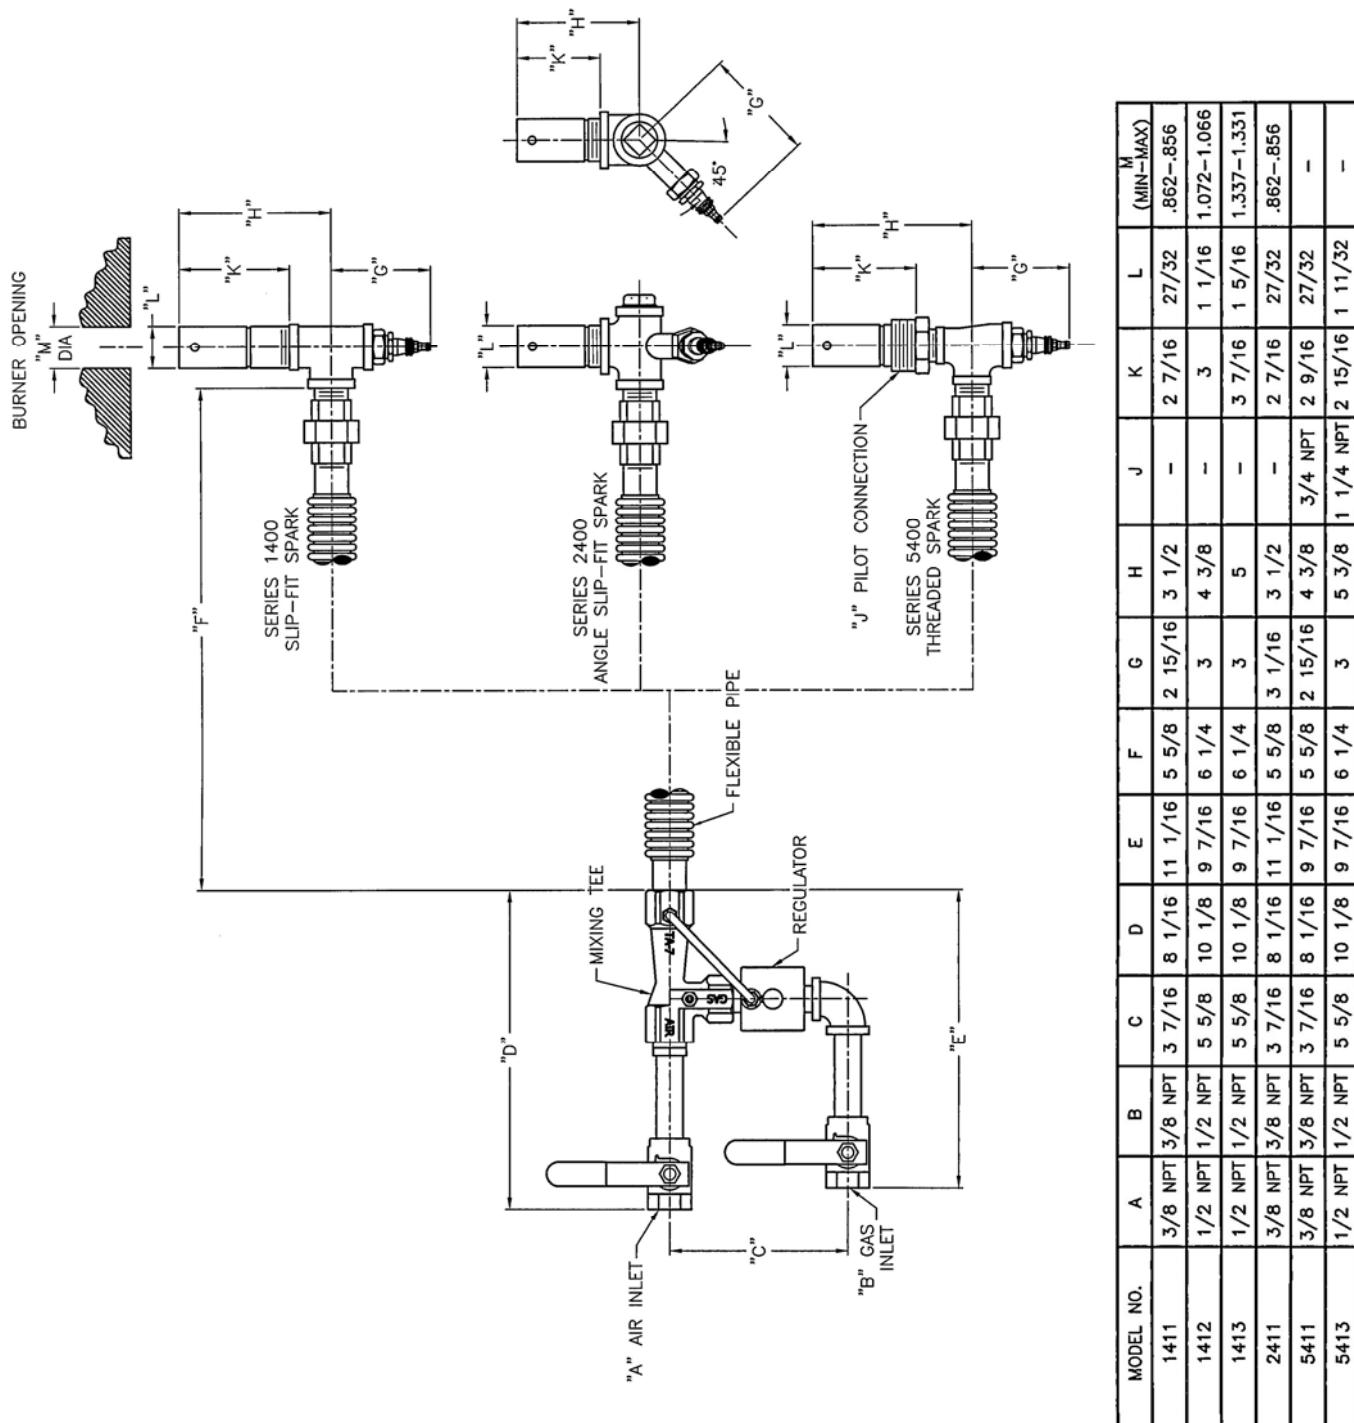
Dimensions Back-Loaded Gas Less Solenoid Valves
